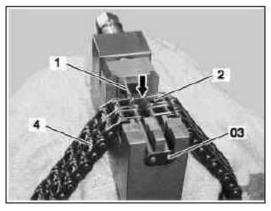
Placing Assembly Insert In Rivet Press Tool Courtesy of MERCEDES-BENZ USA
